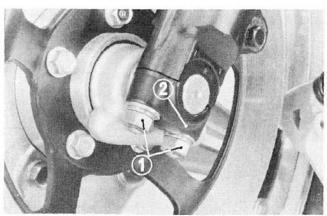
(1) Axle holder nut (2) Axle holder
